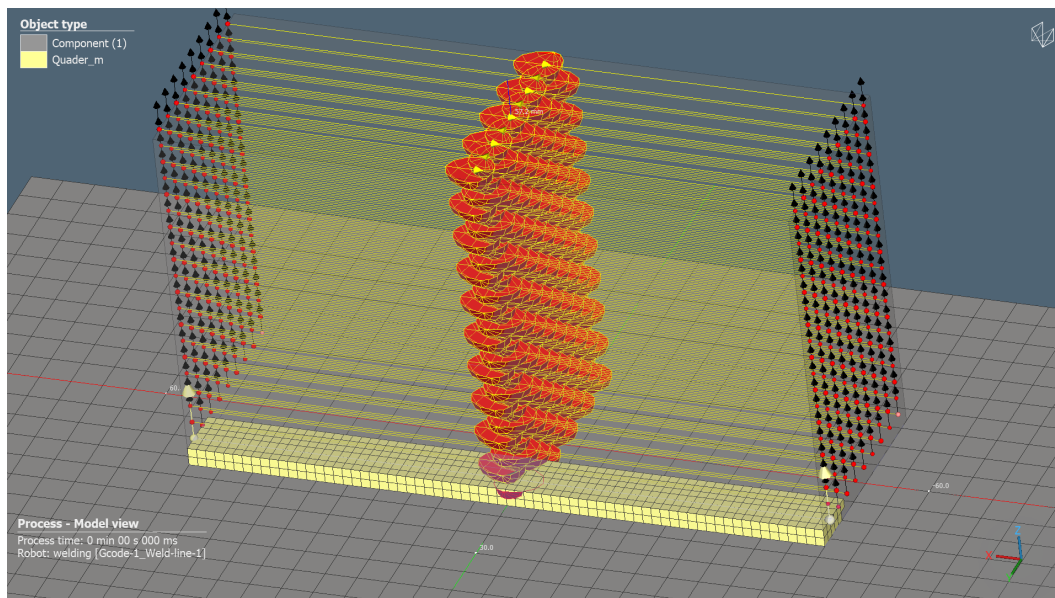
mesh with two elements per welding layer, shown in welding bead 9 in the first welding layer of the cuboid
